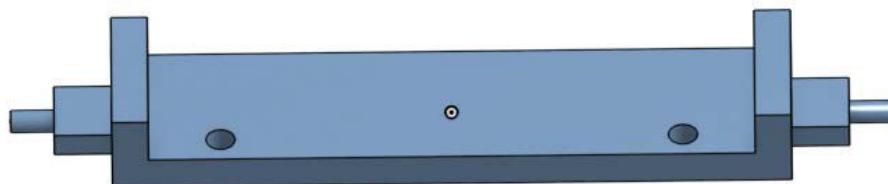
CAD design of the heat sink slider for controlled passive cooling.
